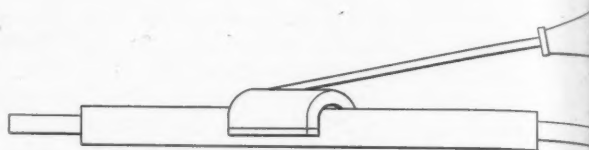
A shop-made sealing iron as used for sealing cracks in cable
